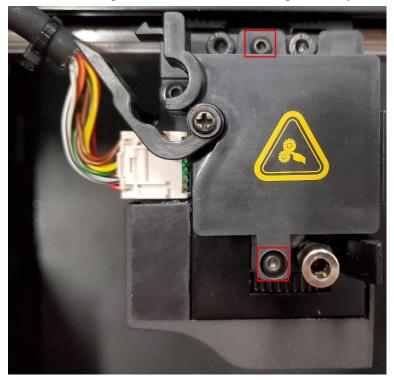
Remove the fixing screws (shown in the red boxes) of the extruder controller board.
